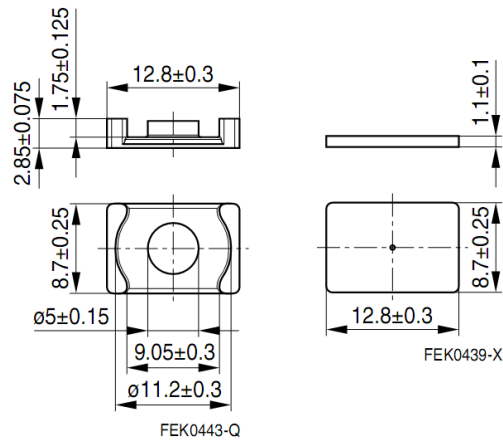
Dimensions of EIQ 13 core set (Unit: mm)
